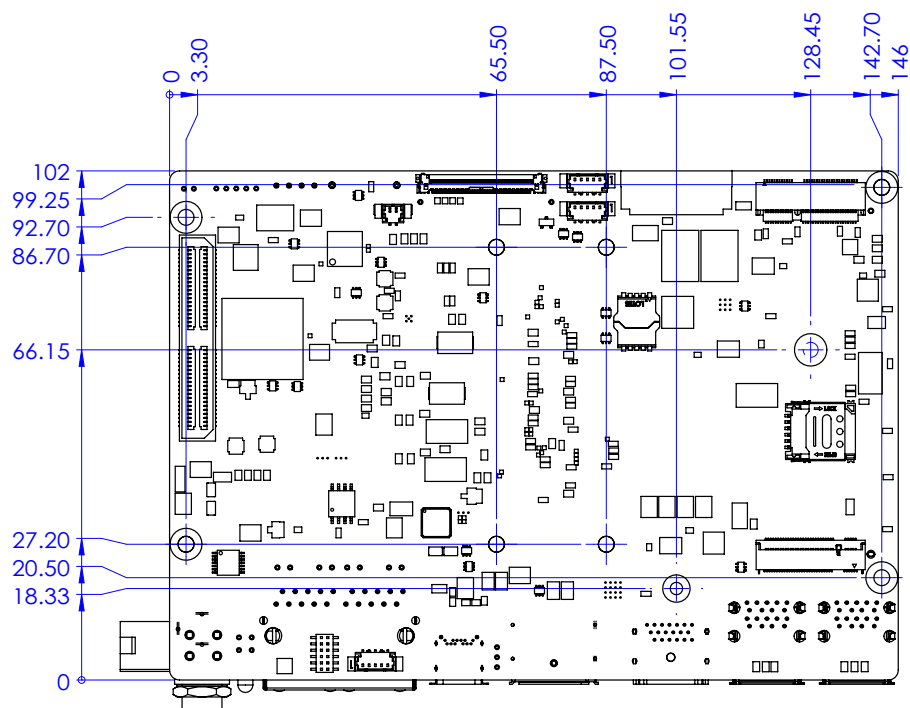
MIO-5375 Mechanical Drawing (Bottom Side)
